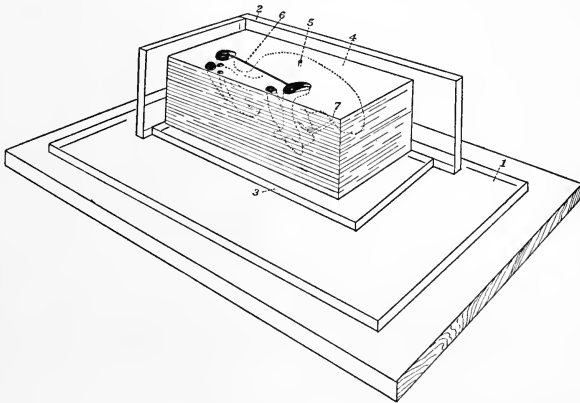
Method of piling wax mold: 1, baseboard; 2, perpendicular right angle corner; 3, glass plate; 4, wax mold; 5, vent; 6, galvanized iron wire bridge; 7, gate for plaster between parts of mold.
